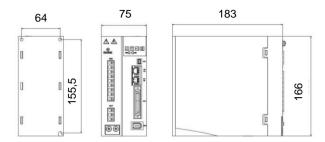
RT20-EA010/015H Appearance and dimensions (Unit, mm)
